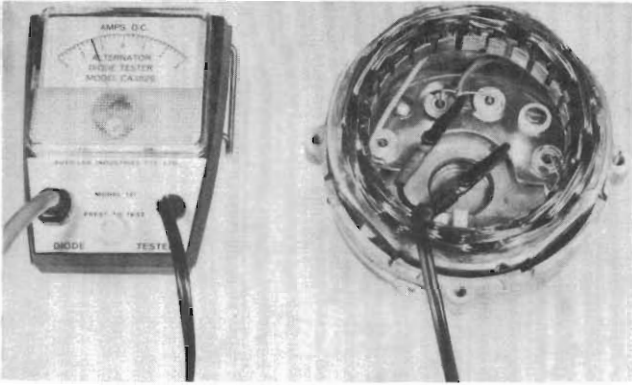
Testing Positive Case Rectifiers (typical view)
